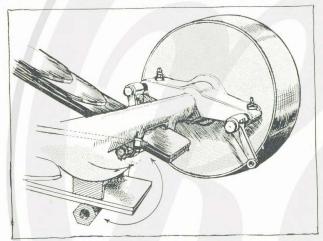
RIGHT-HAND END OF THE REAR AXLE OF THE
